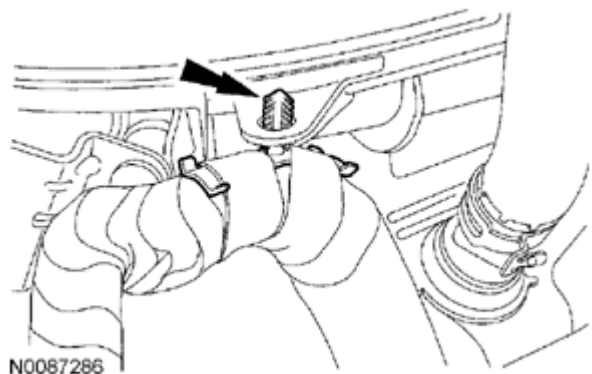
Locating Wiring Harness Retainer Of Upper Intake Manifold
